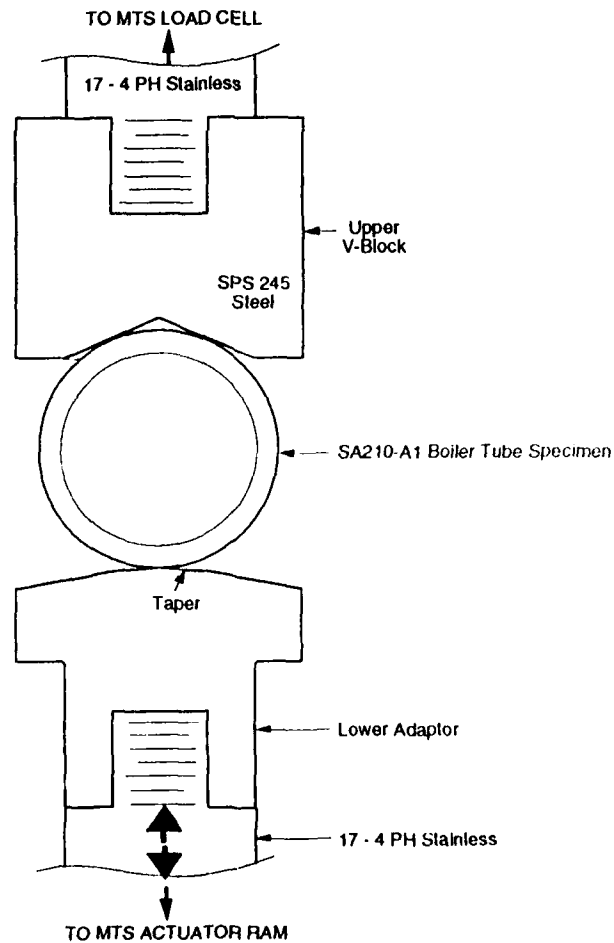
Schematic of specimen and grips assembly for the plain tube geometry and tapered lower compression adaptor
